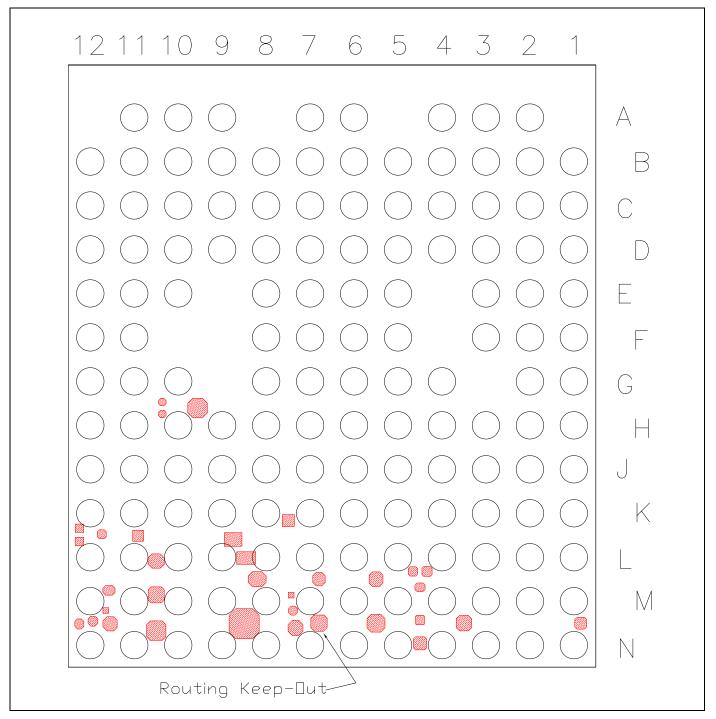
WLBGA Keep-out Areas for PCB Layout—Bottom View with Balls Facing Up
